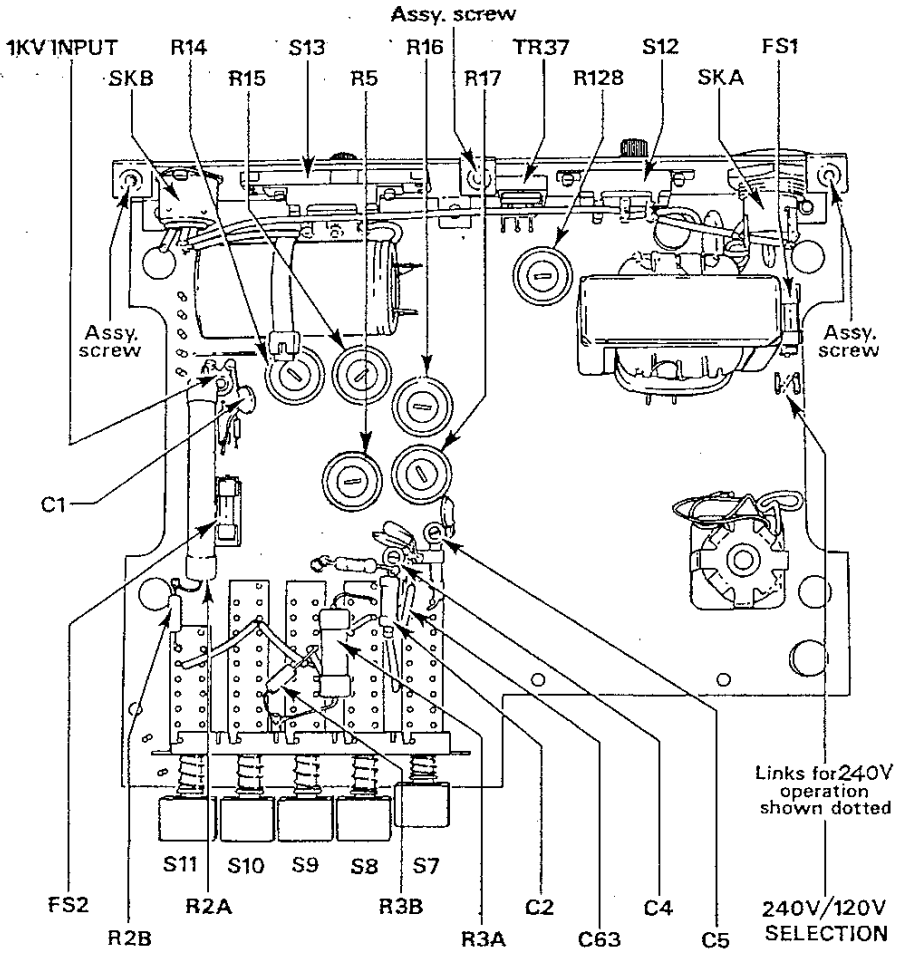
POWER SUPPLY & ATTENUATOR ASSEMBLY COMPONENT LOCATION
